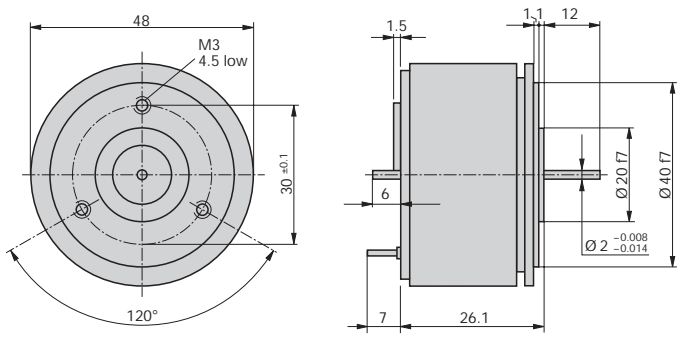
KINAX 2W2 with special drive shaft at front and at rear. At front: \varnothing 2 mm, length 12 mm. At rear: \varnothing 2 mm, length 6 mm.
